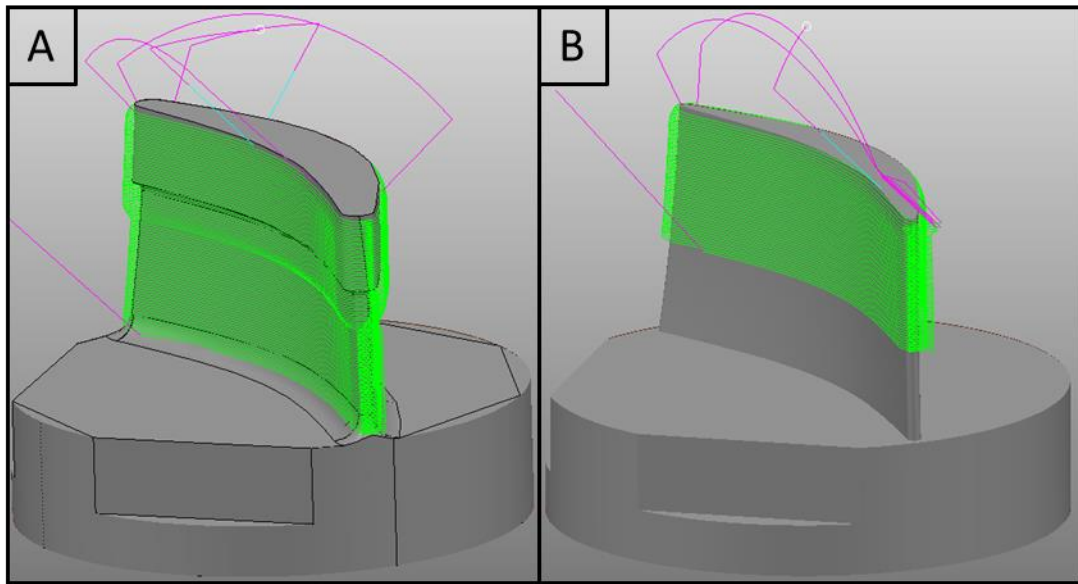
Probe paths created for a machined blade with weld geometry. (A) Probe path for part alignment. (B) Probe path for blade deformation registration on non-weld region.
